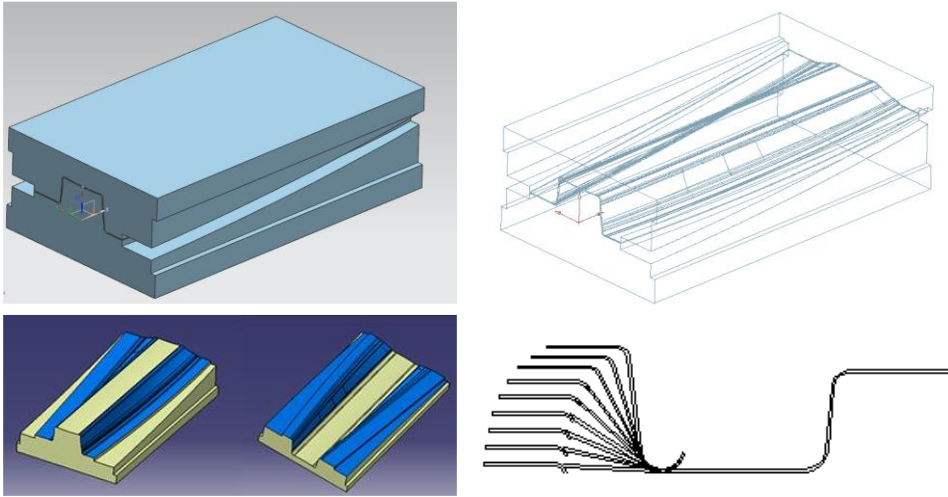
The shape of the tools for the press-forming process and the deformation profiles of the sheet workpiece during forming
